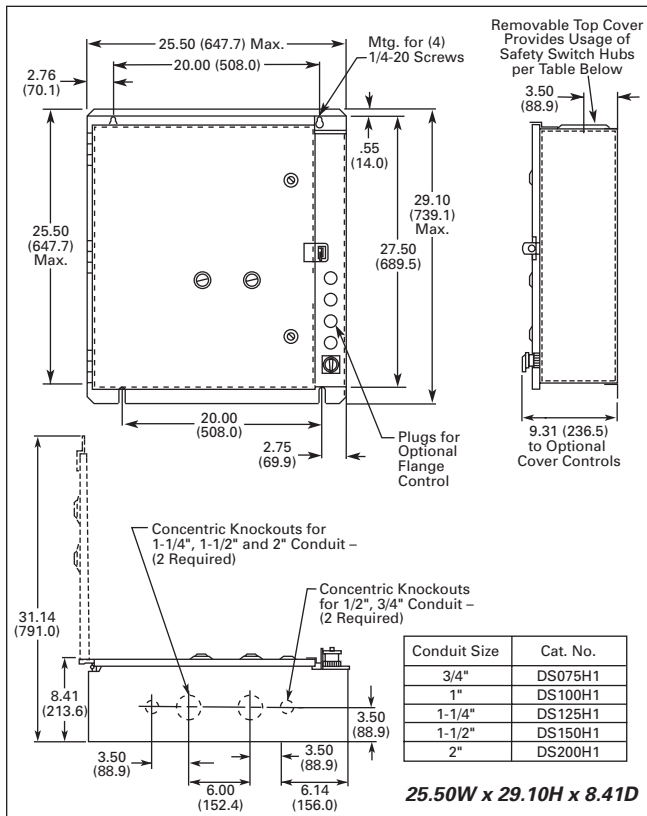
Box 9, Type 3R — Approximate Dimensions in Inches (mm)
